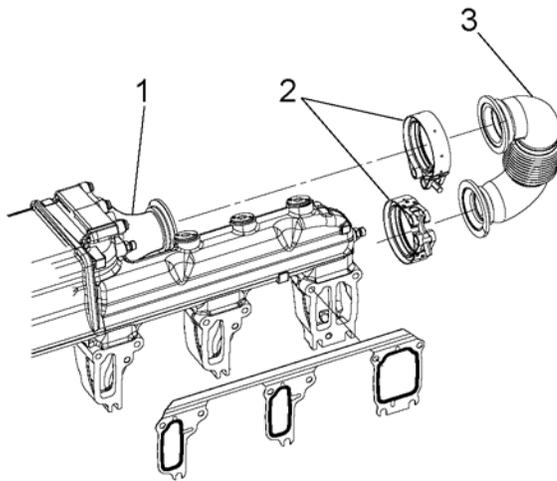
EPA07 DD13 EGR Cooler Water Manifold and Related Parts
